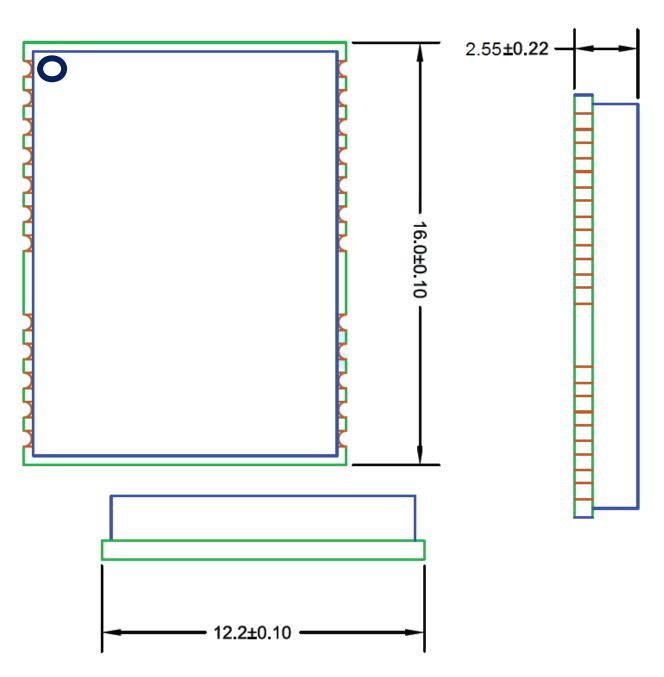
Package Outline Drawing (Top View) Dimensions are in mm
